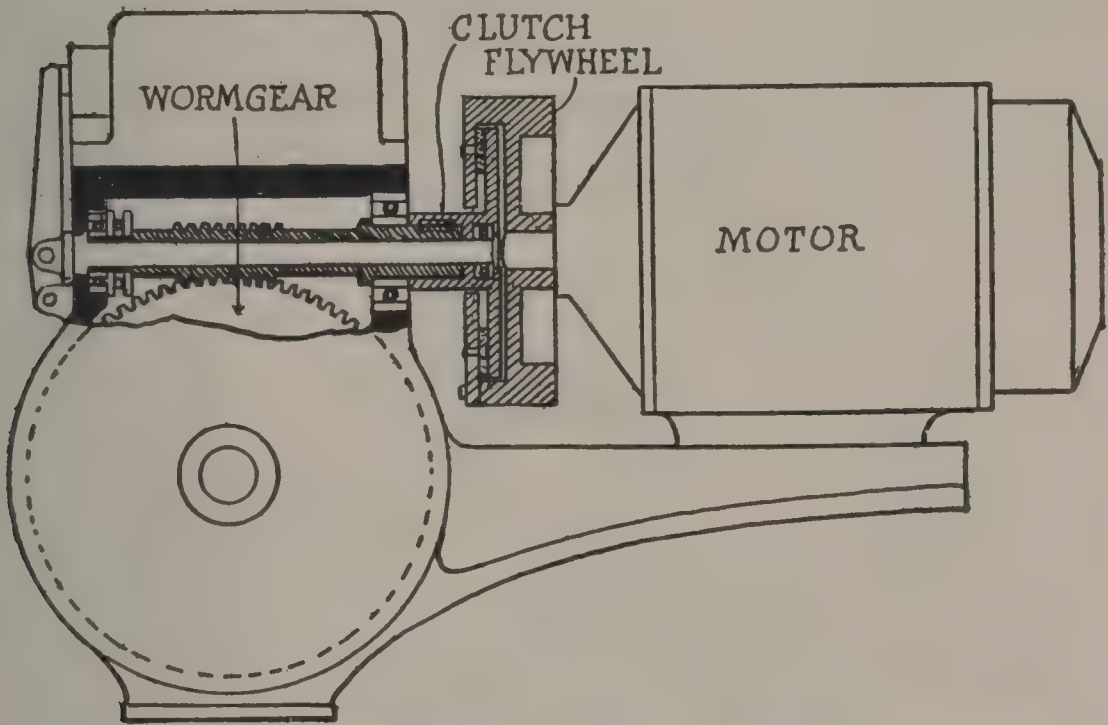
Friction clutch and worm-and-worm gear which connects Hartford starting motor to the engine
